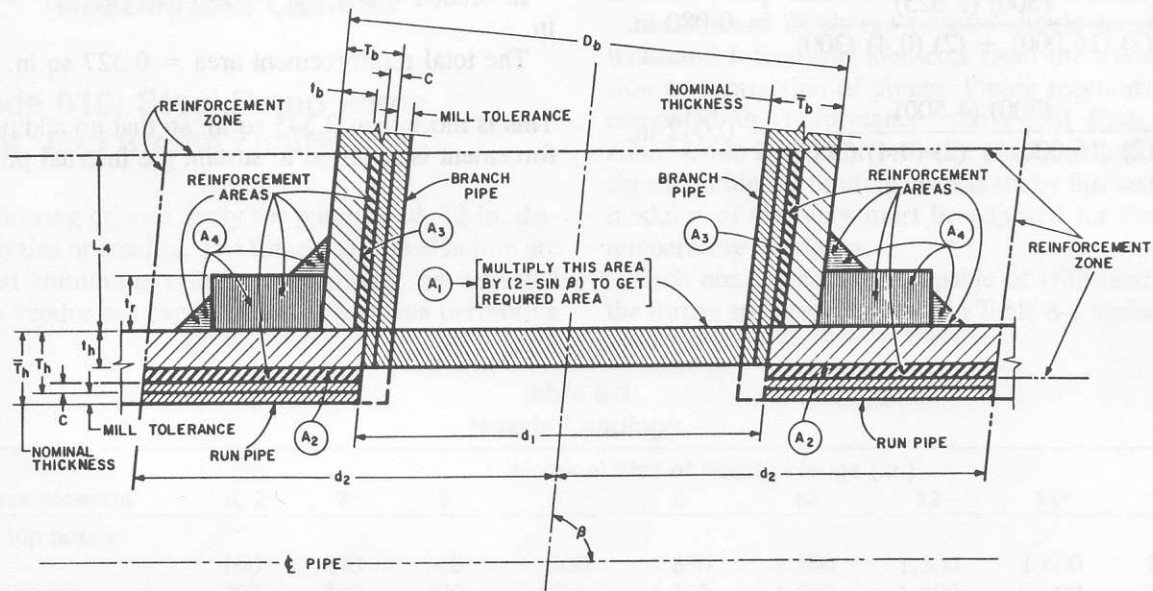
This figure illustrates the nomenclature used in ANSI Code B31.3, Section 304.3.3, 1980. It does not indicate complete welding details or a preferred method of construction. (Reprinted courtesy of the American Society of Mechanical Engineers.)
